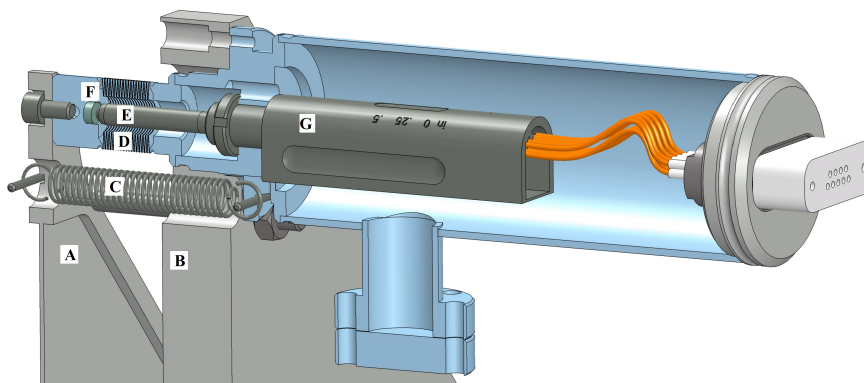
Cut view of the encapsulated commercial stepper motor. A: triangular arm; B: mirror mount base; C: spring; D: small bellow; E: stepper motor screw; F: hard steel pellet used to avoid friction of the end of the motor screw; G: stepper motor body.
